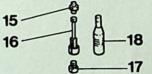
Carburettor - all Z-2 and Z-Z models
